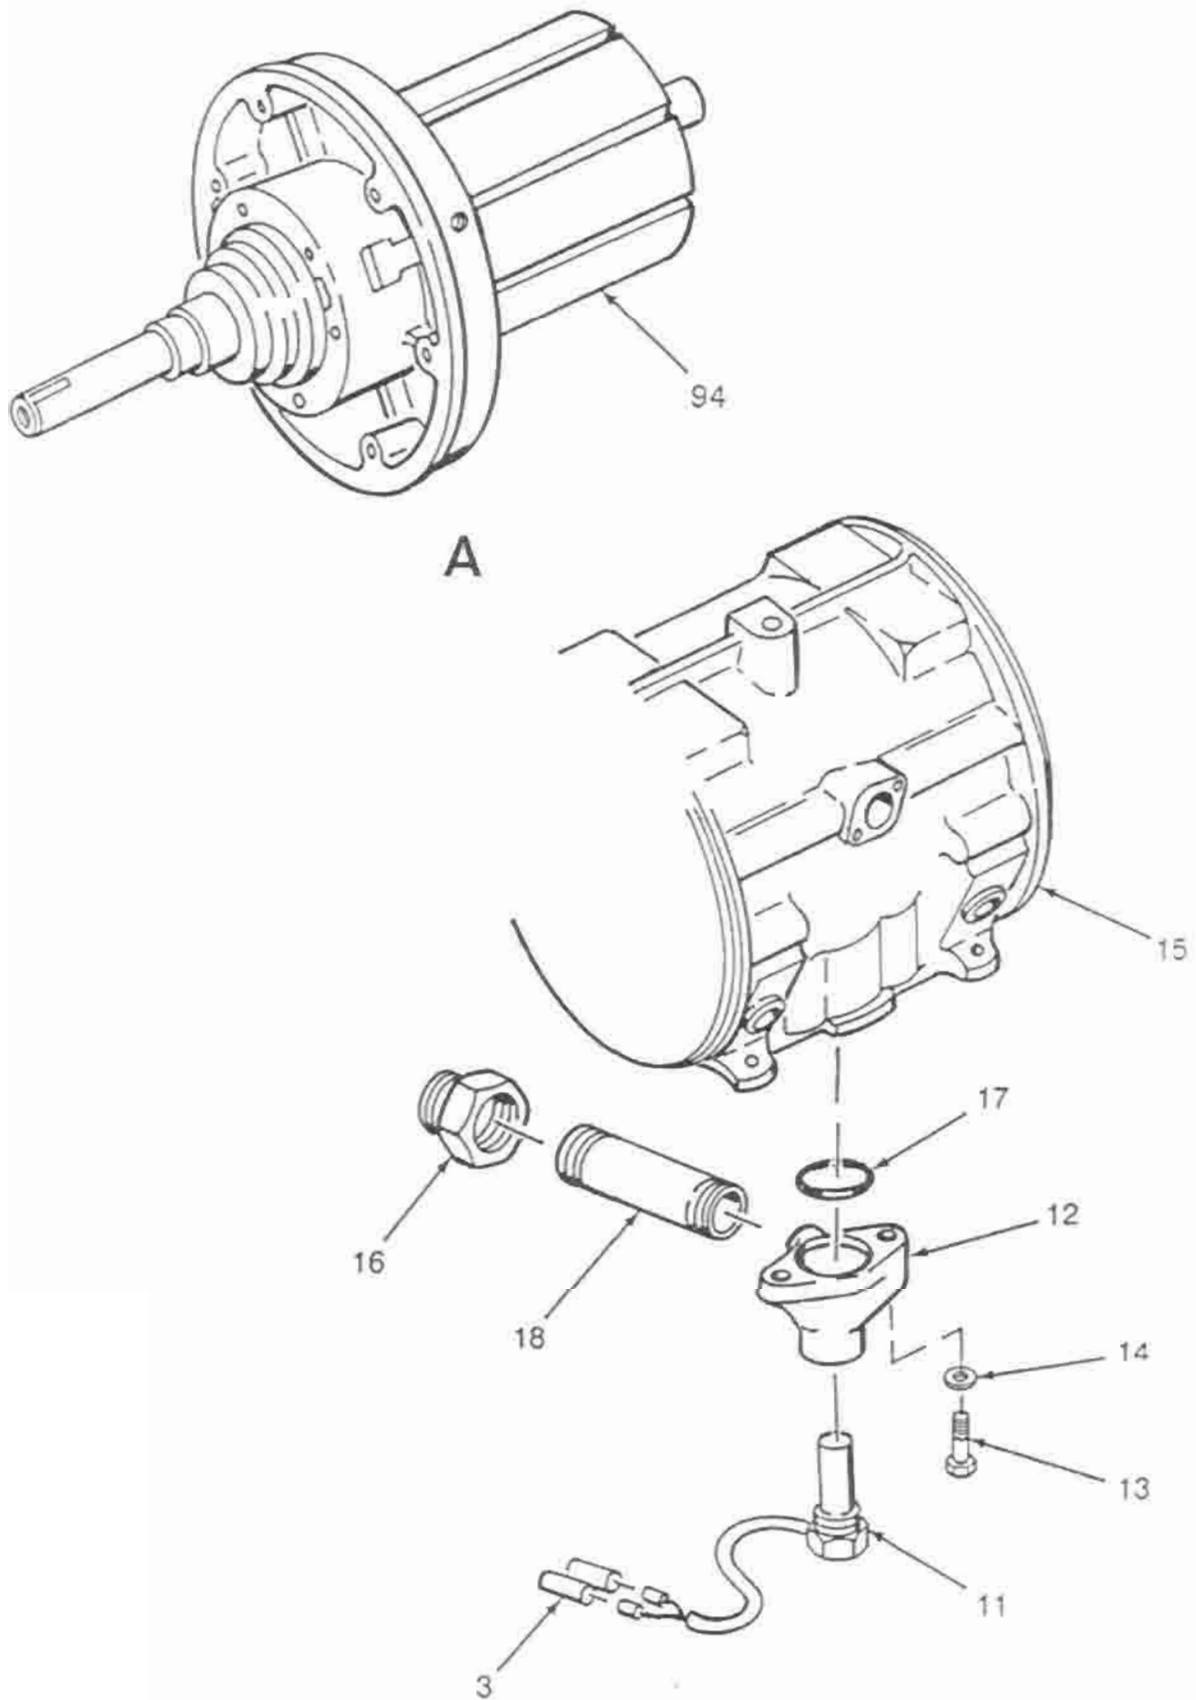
Air Compressor Group Disassembly (Sheet 4)
